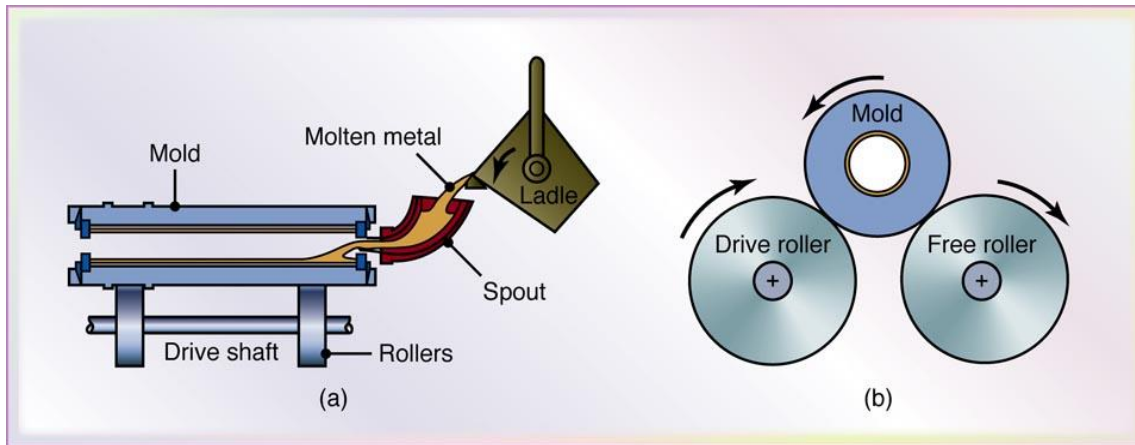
Schematic Set-up of Horizontal Centrifugal Casting Process
